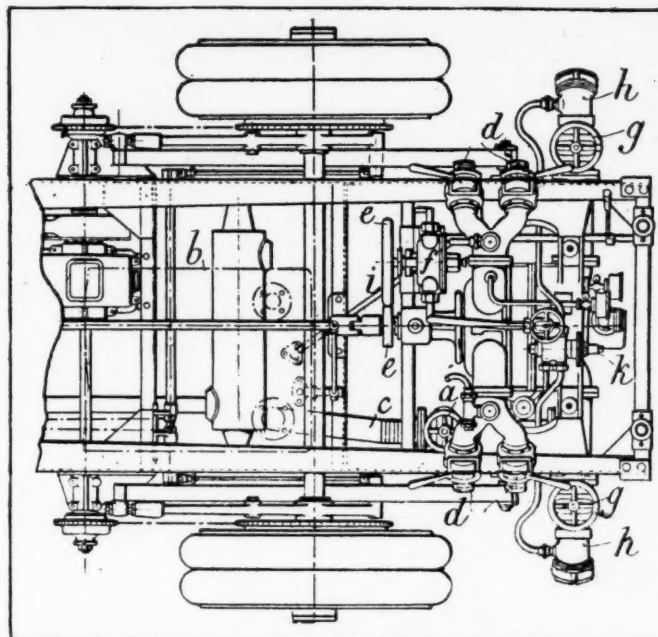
Rear end of Fiat fire engine chassis with centrifugal pump
